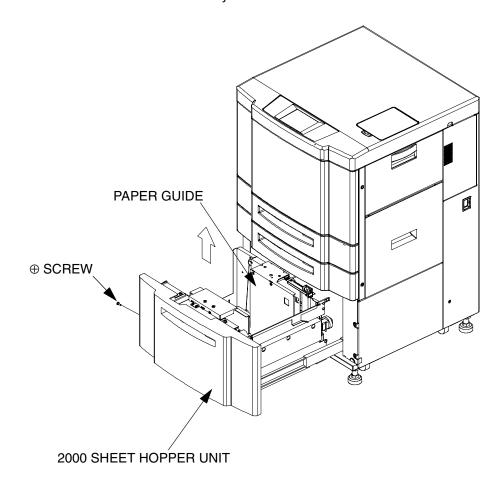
Removal of the 2000 Sheet Hopper (Hopper 1)
